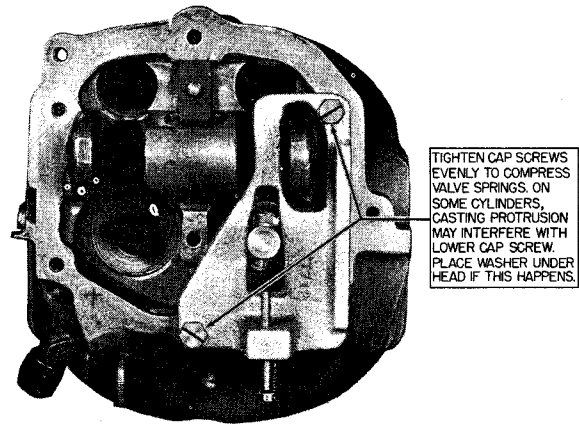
Compressor Plate Fixture Installed on Rocker Box
